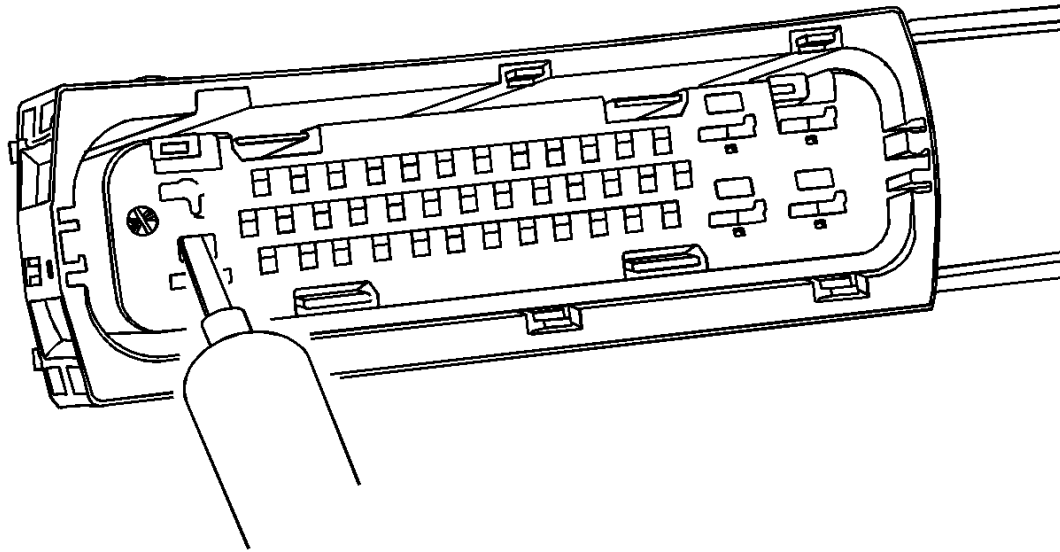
View Of Release Tool Being Used For Larger Terminals
